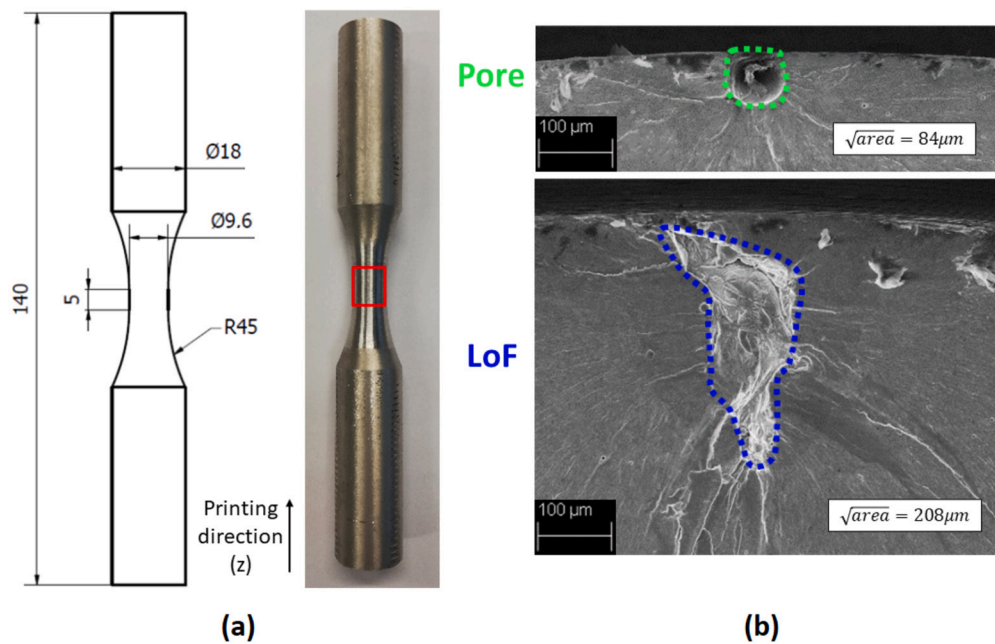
(a) HCF specimen geometry (all dimensions in [mm]) with two exemplary defects at the origin of fracture: (b) a gas-entrapped pore and a lack-of-fusion. Adapted from [11].
